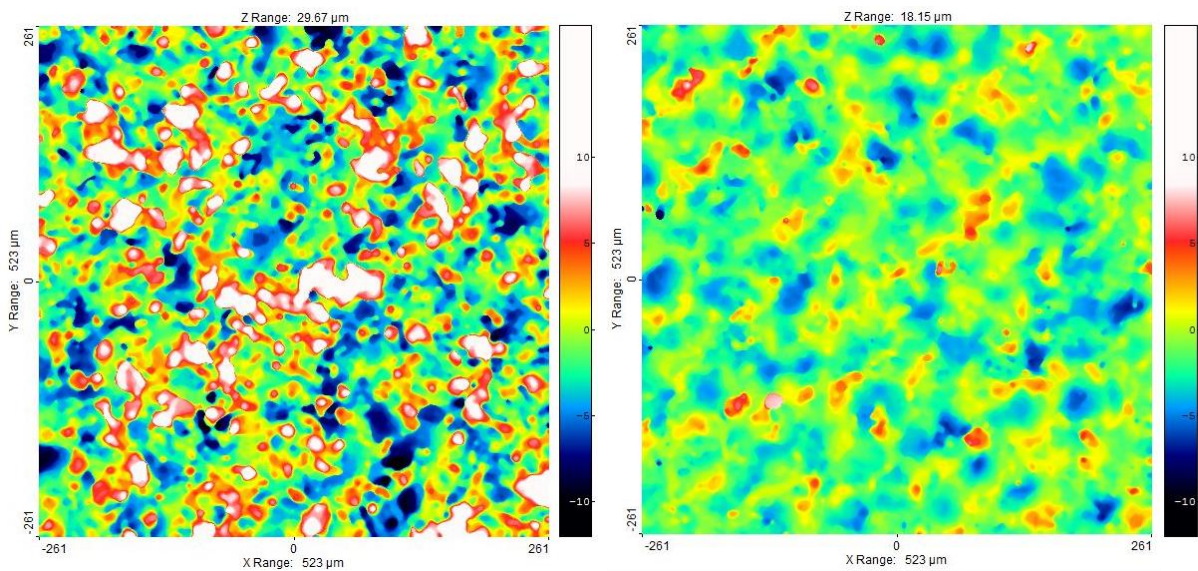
Non-contact 3D profilometer image of machined surface (a) under original settings (b) after process control
